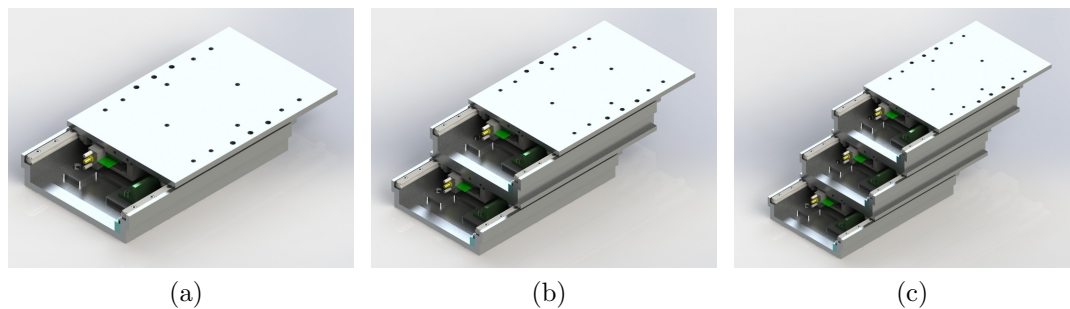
Example Single Axis Assembly Configurations with a One, (b) Two and (c) Three Sliders
